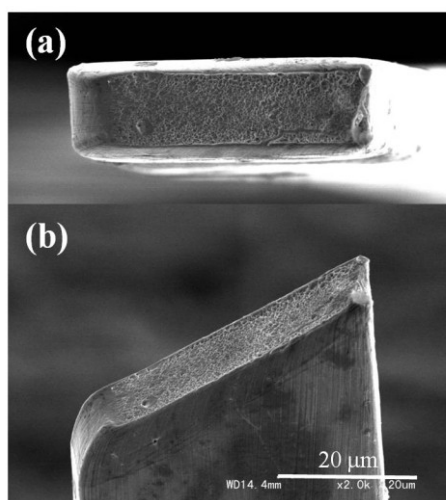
SEM micrographs of the Ni-16.9 at. % W tensile test specimen after fracture, showing the large necking near the fracture surface.
